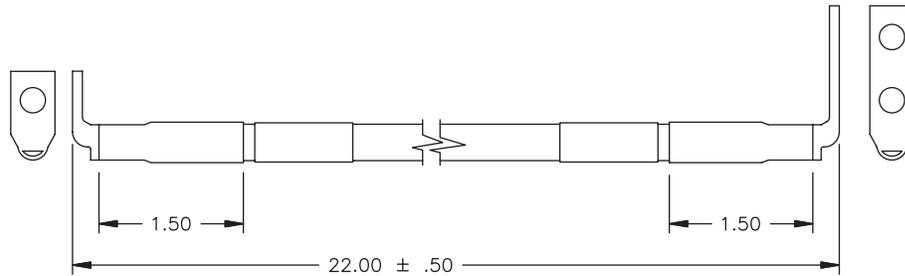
Adapter Cable HMUX (P/N 830-0857-01)
